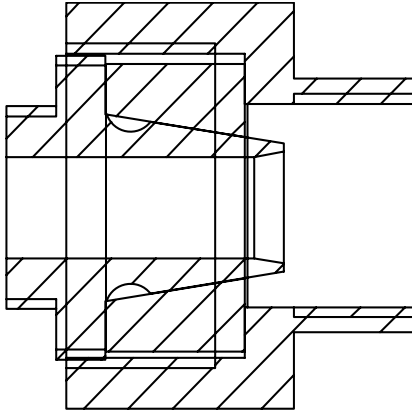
The cable gland design consisting of the gland, lock ring and an outer covering fitted together.
